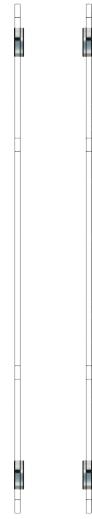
Acrylic supports with bearings positioned in the final conveyor belt assembly.
